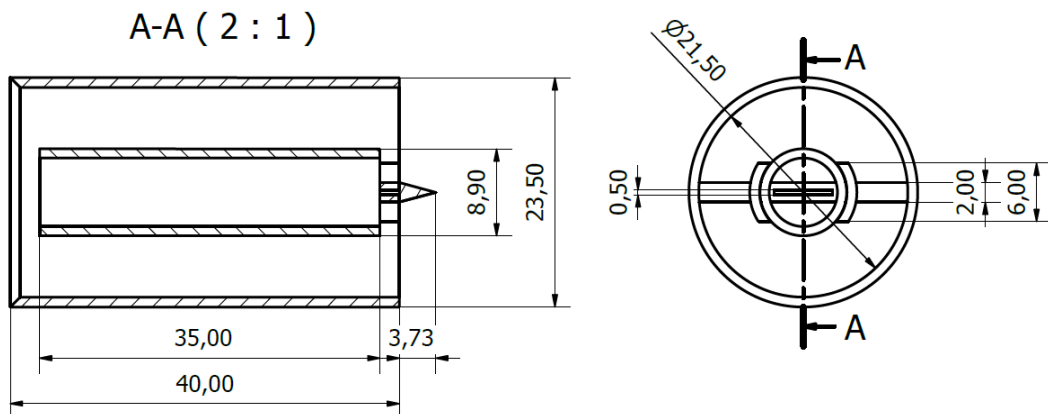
Schematic showing the modified housing design (left) front view and (right) sectional side view.
